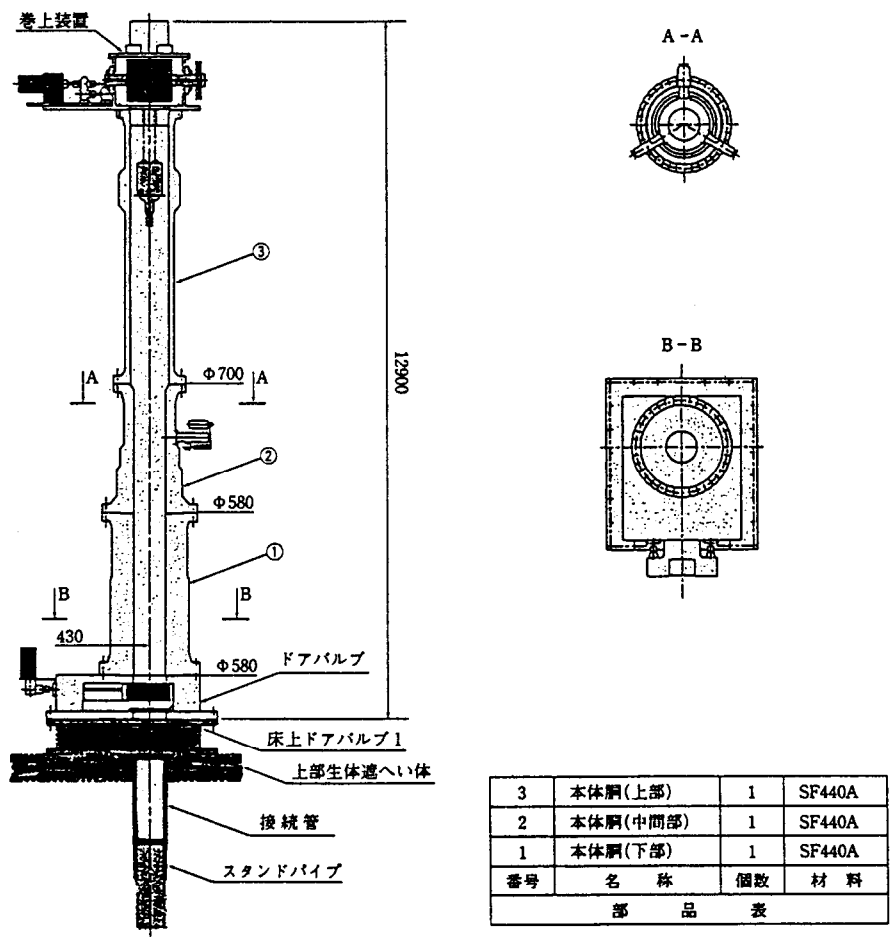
Structural drawing of control rod handling machine of HTTR
